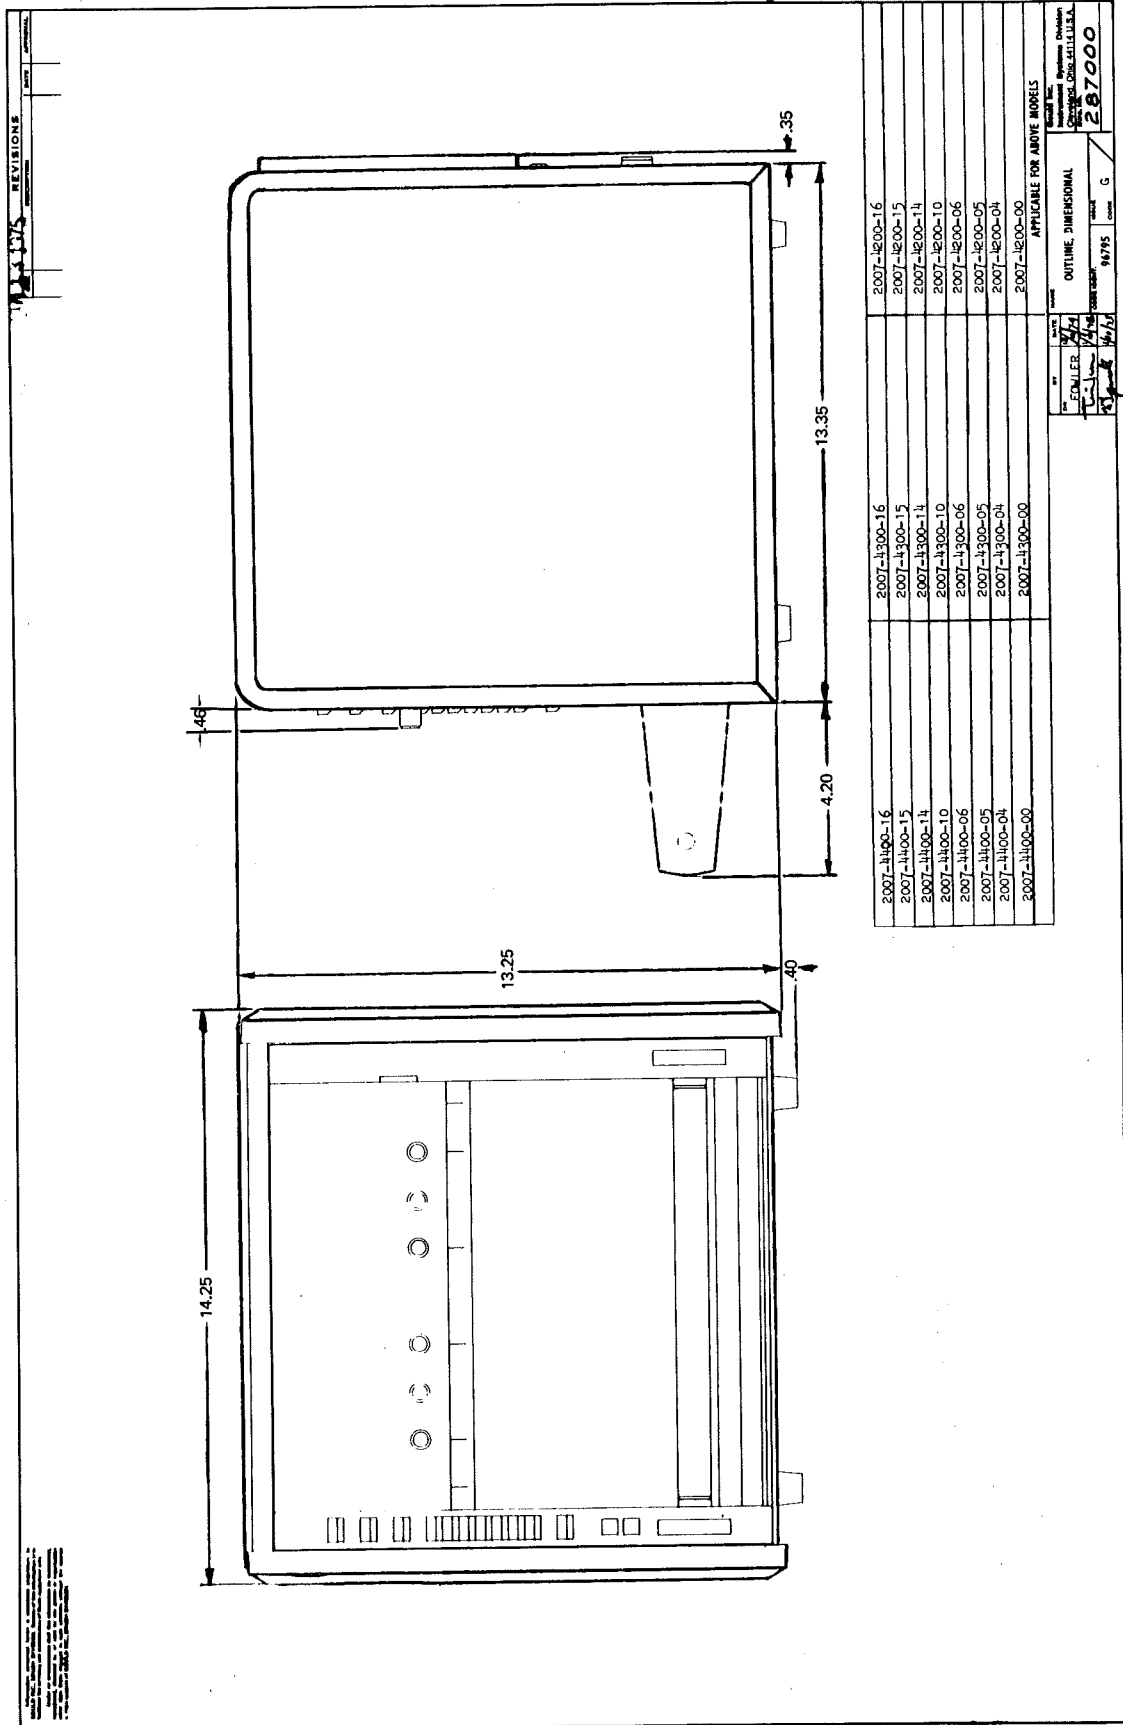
OUTLINE DIMENSIONS - 2400 SERIES
